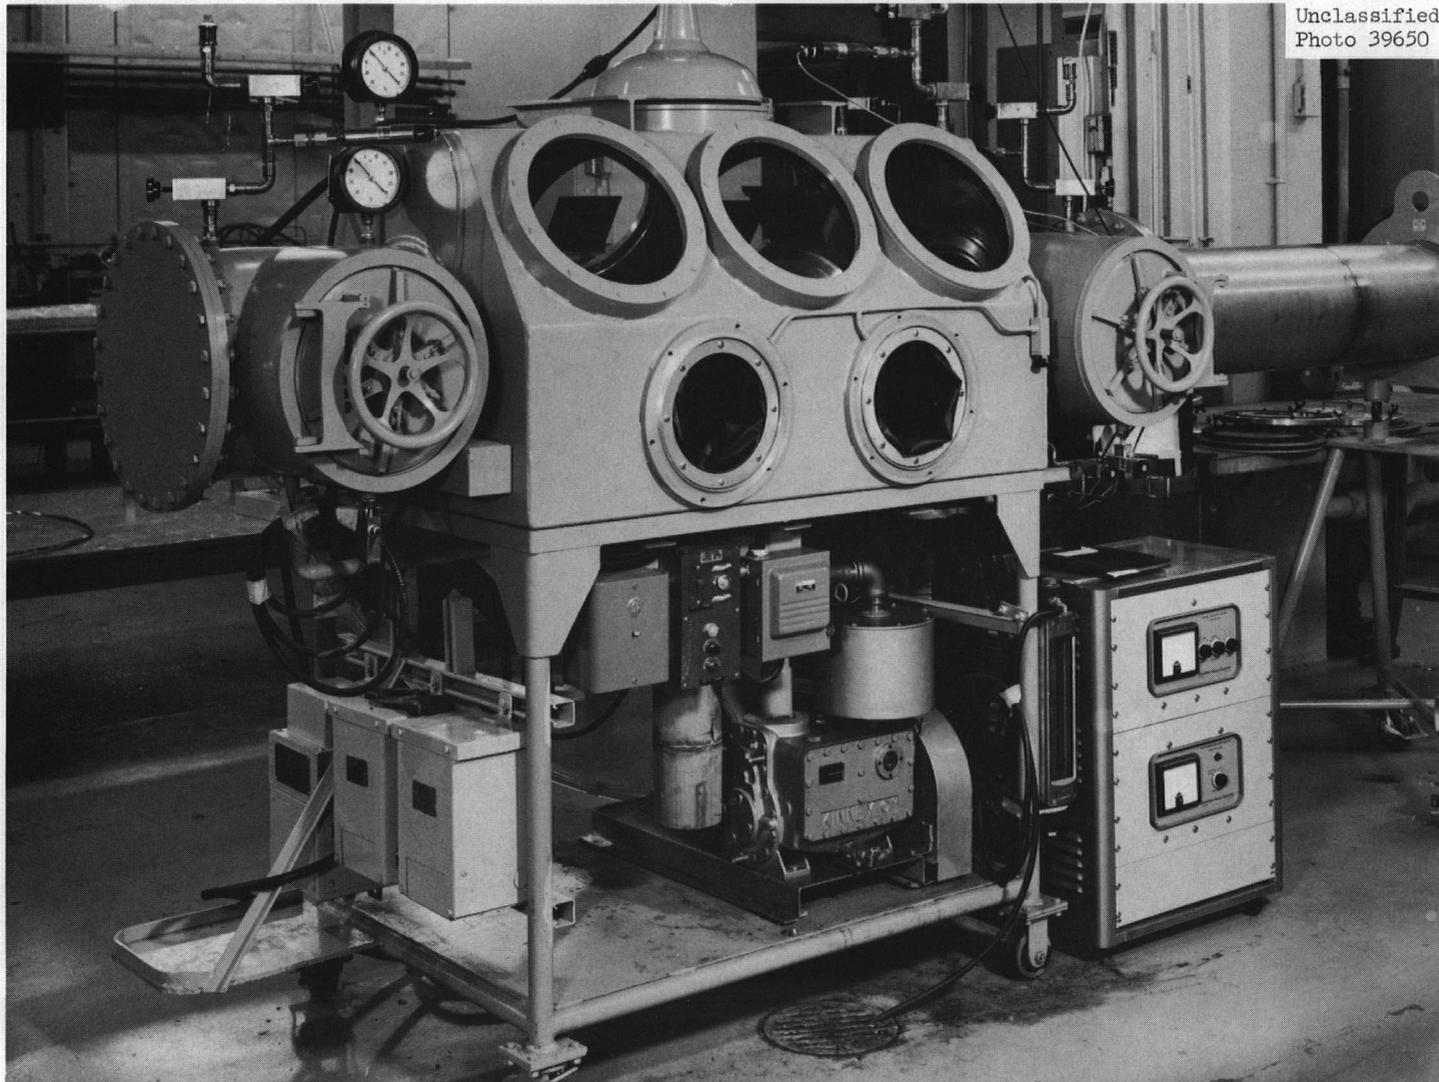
Blickman Welding Chamber in Assembly Area.
